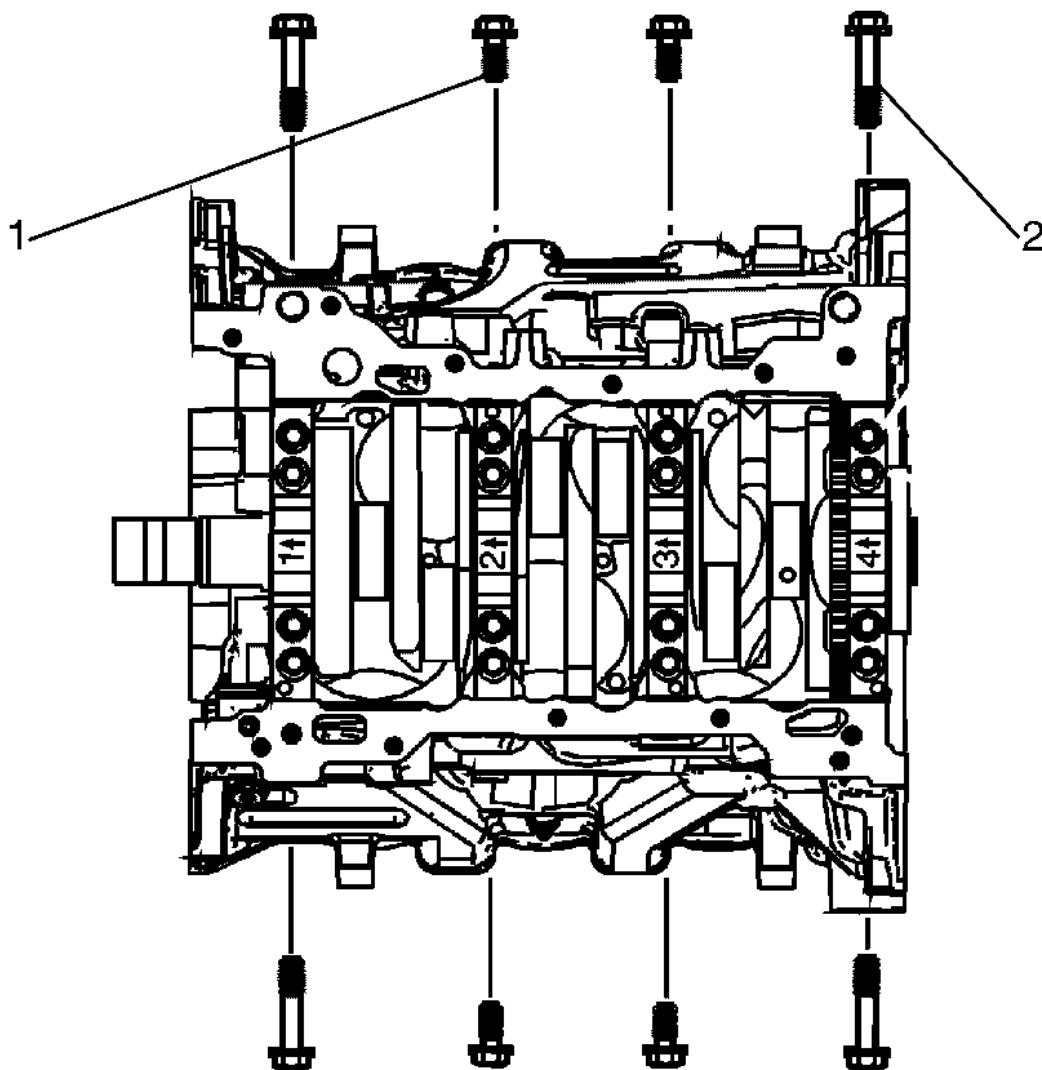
View Of Short/Inner & Long/Outer Crankshaft Bearing Cap To Cylinder Block Retaining Bolt Tightening Sequence
